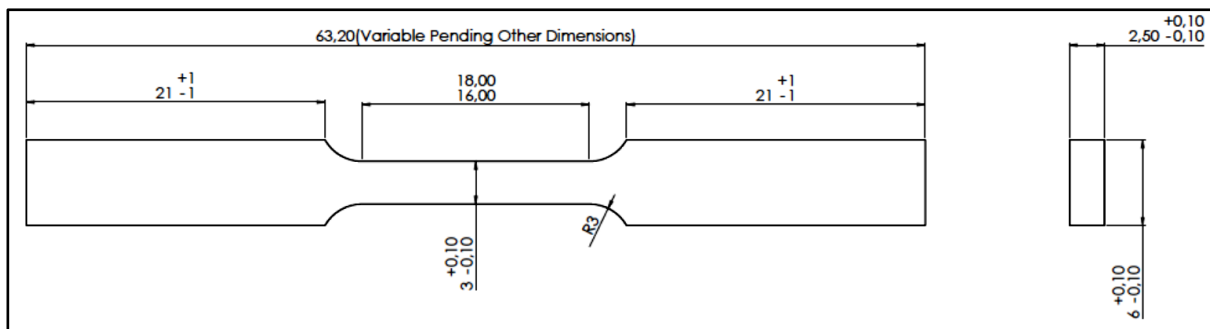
Drawing of the tensile specimen dimensions utilised.
